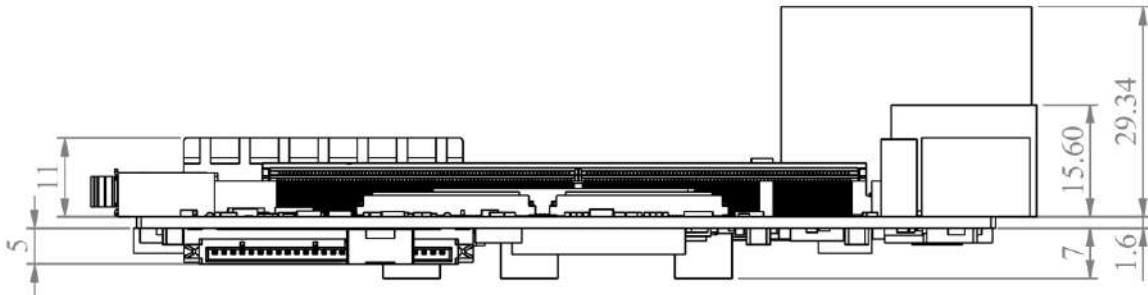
Mechanical dimensions of i.MX8 SMARC Carrier Board - Side View
